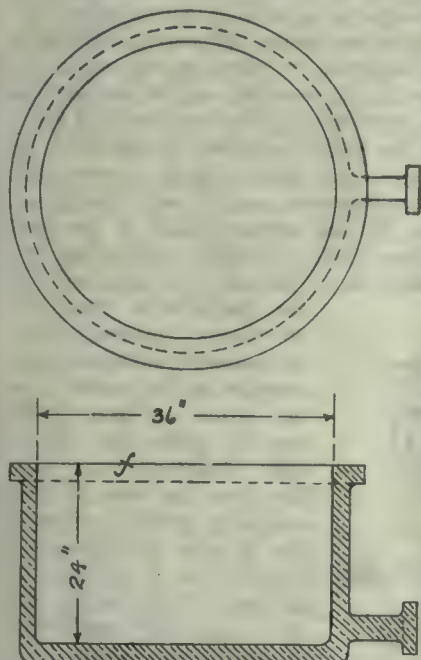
PLAN AND SECTIONAL VIEWS OF WORK.
